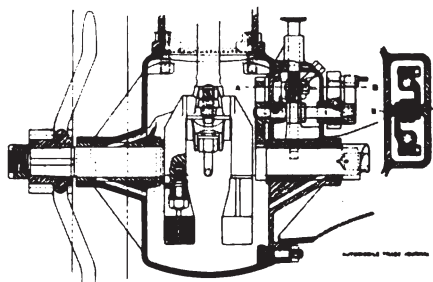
Cross-section of the Brush single-cylinder engine crank case, showing counter weights filled with lead, the return oil ways from the main bearings into the case, the cam gears and the small double cam shaft in its case above the main shaft. At the right is shown a horizontal section on the line A, B, through the cam-follower rollers, as described in the text.
